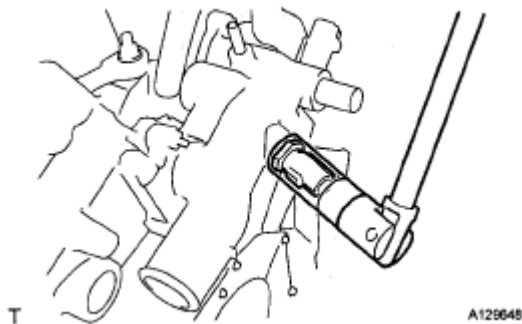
Using Deep Socket Wrench To Remove EFI Engine Coolant Temperature Sensor & Gasket
